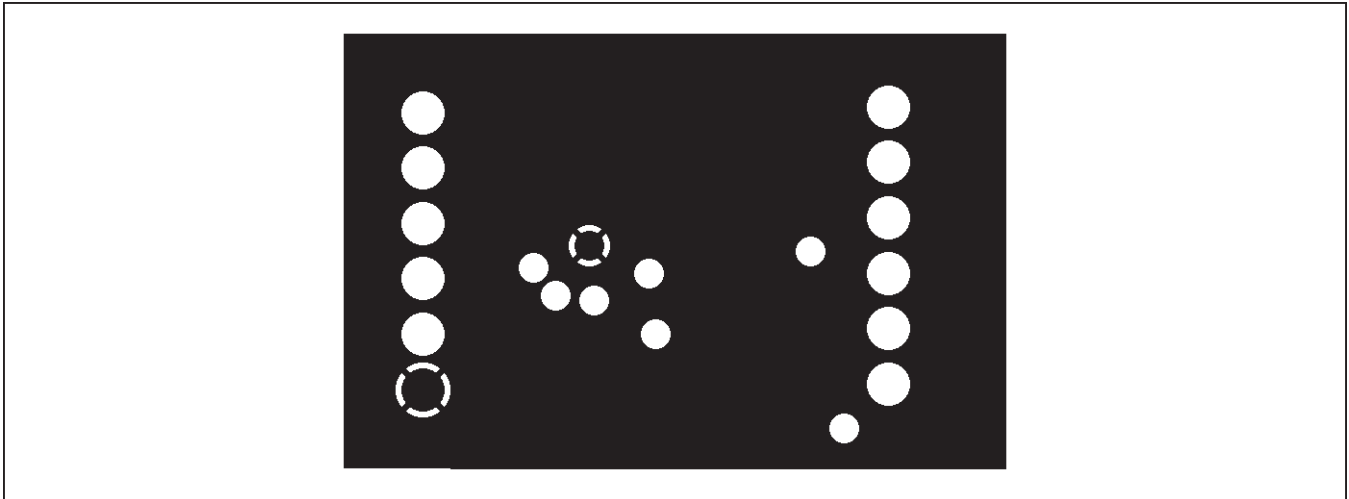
MAX5487PMB1 Peripheral Module PCB Layout—Inner Layer 2 (Power)
